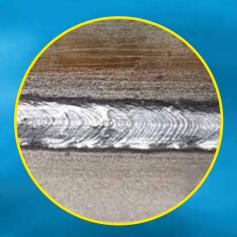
PLATE THICKNESS. QUICKSET WELDING
